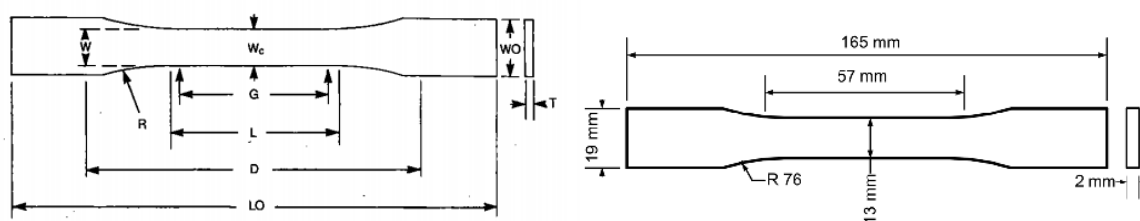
The dimensions of cladding sample INC and IND in dog-bone shape cutting for tensile test.
